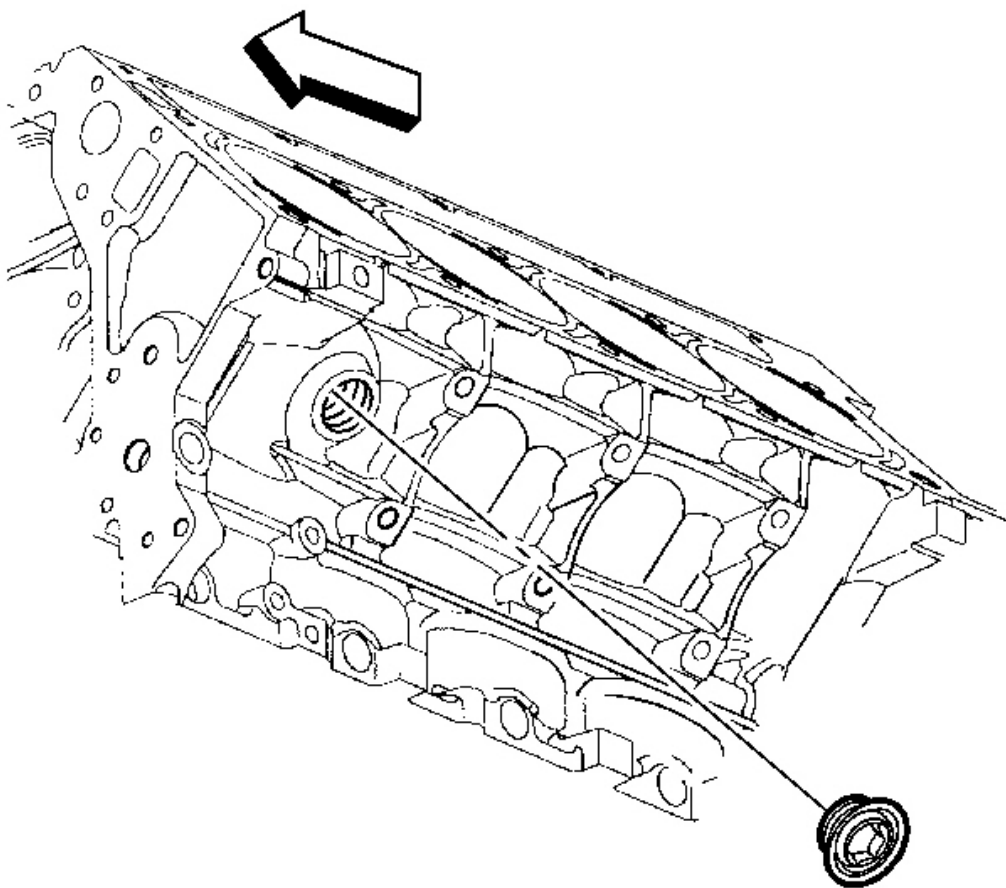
View Of Engine Block Left Rear Coolant Drain Hole Plug
